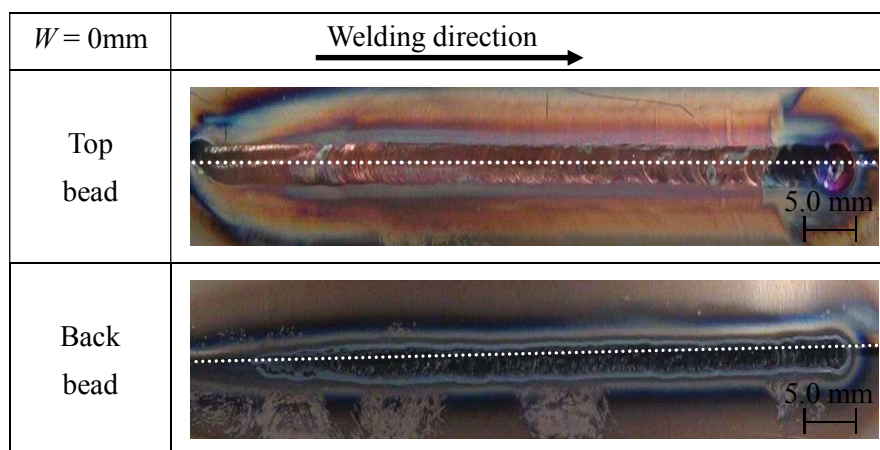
Appearance of hybrid welding beads without laser weaving ($W = 0 \text{ mm}$)
